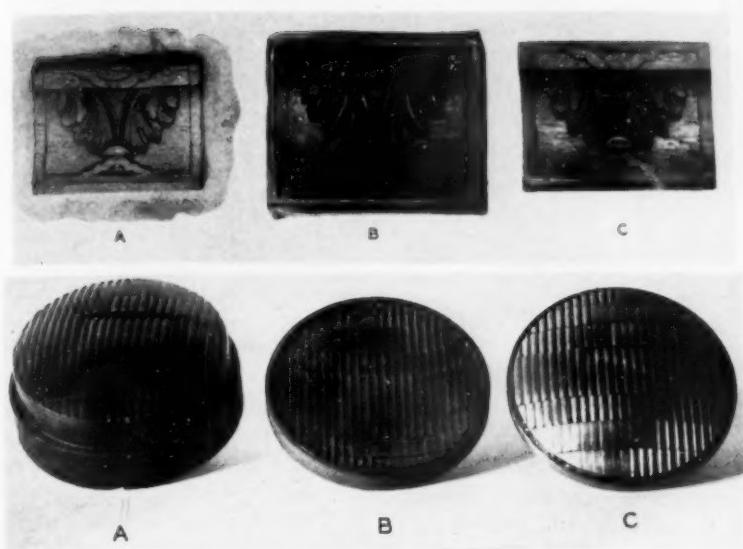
(top) shows mold for making facsimiles of carved mahogany. Figure 7 illustrates making of molds for glass making.
